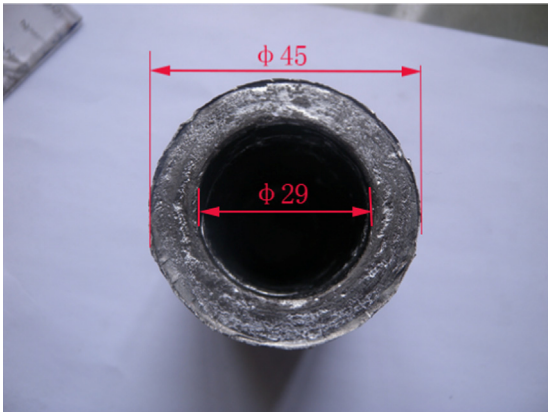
Typical cup-shaped samples made by backward extrusion.
